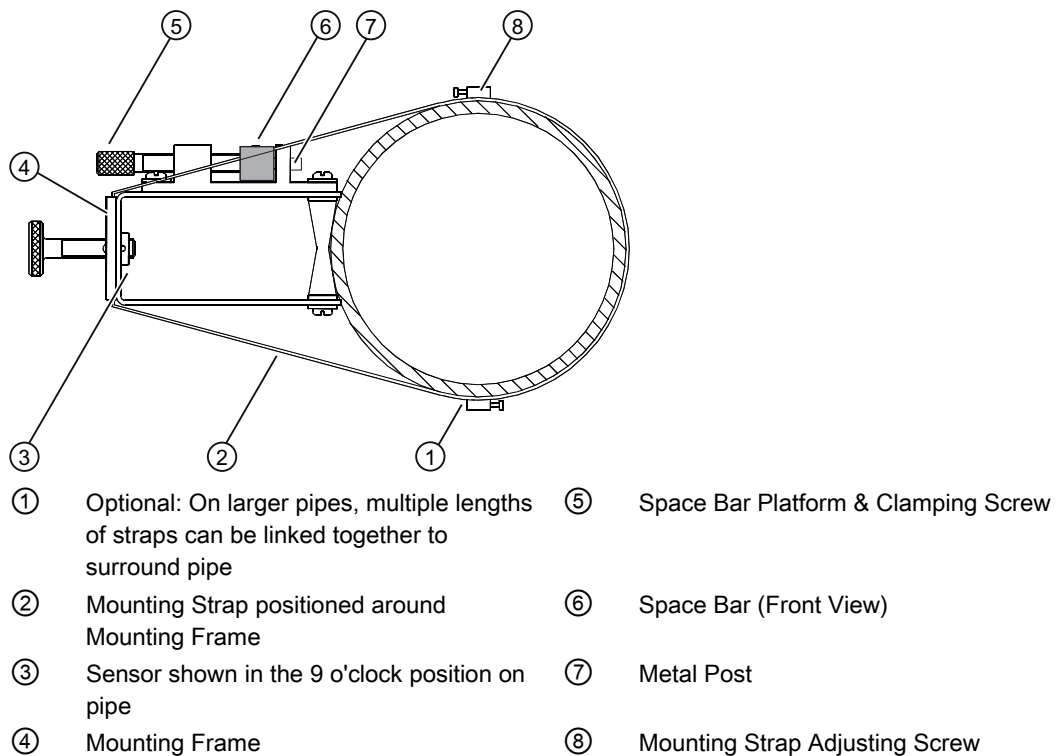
Reflect Mount with Mounting Frames and Spacer Bar
